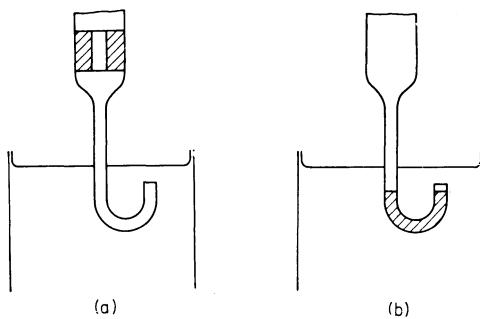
Sealing-off with trapped solder: (a) before and (b) after sealing-off
